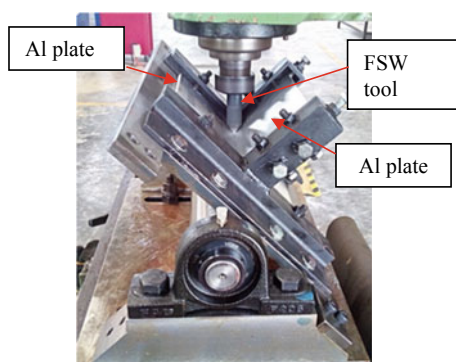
Welding jig for T-joint setup on Milko 37 milling machine
